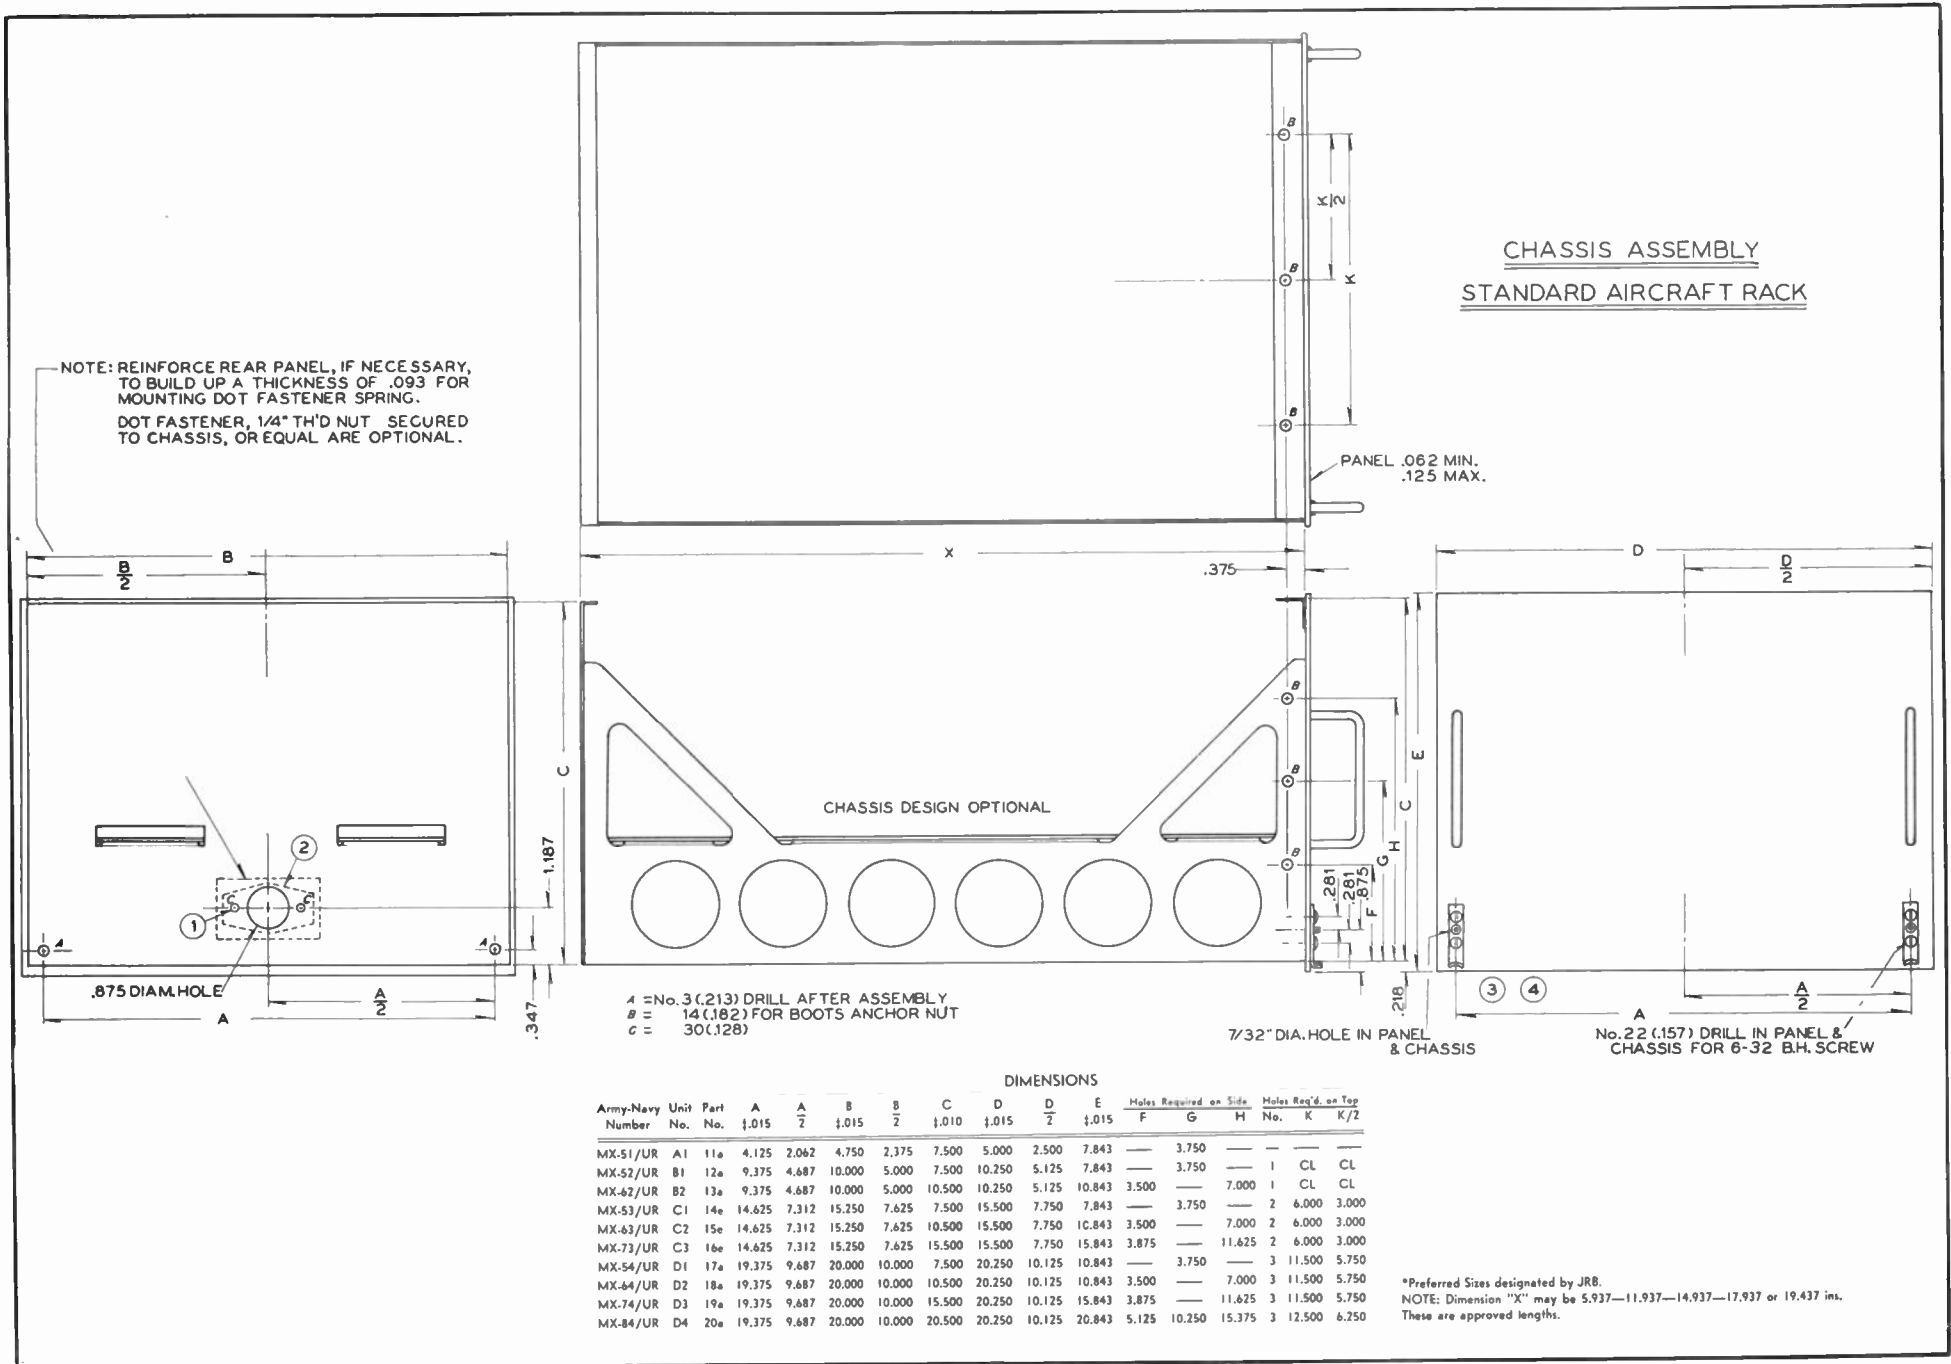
ONE-FOURTH SCALE DRAWING OF THE STANDARD CHASSIS ASSEMBLY. EXCEPT FOR SPECIFIED DIMENSIONS, THE CHASSIS CAN BE MODIFIED AS REQUIRED
